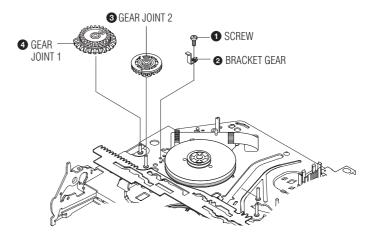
Bracket Gear, Gear Joint 1, 2 Removal
